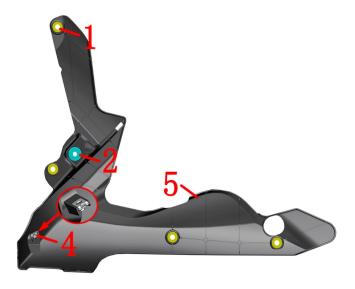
WRAPAROUND COMPONENTS		Under -guidance stream component 2	CHK	(0)
